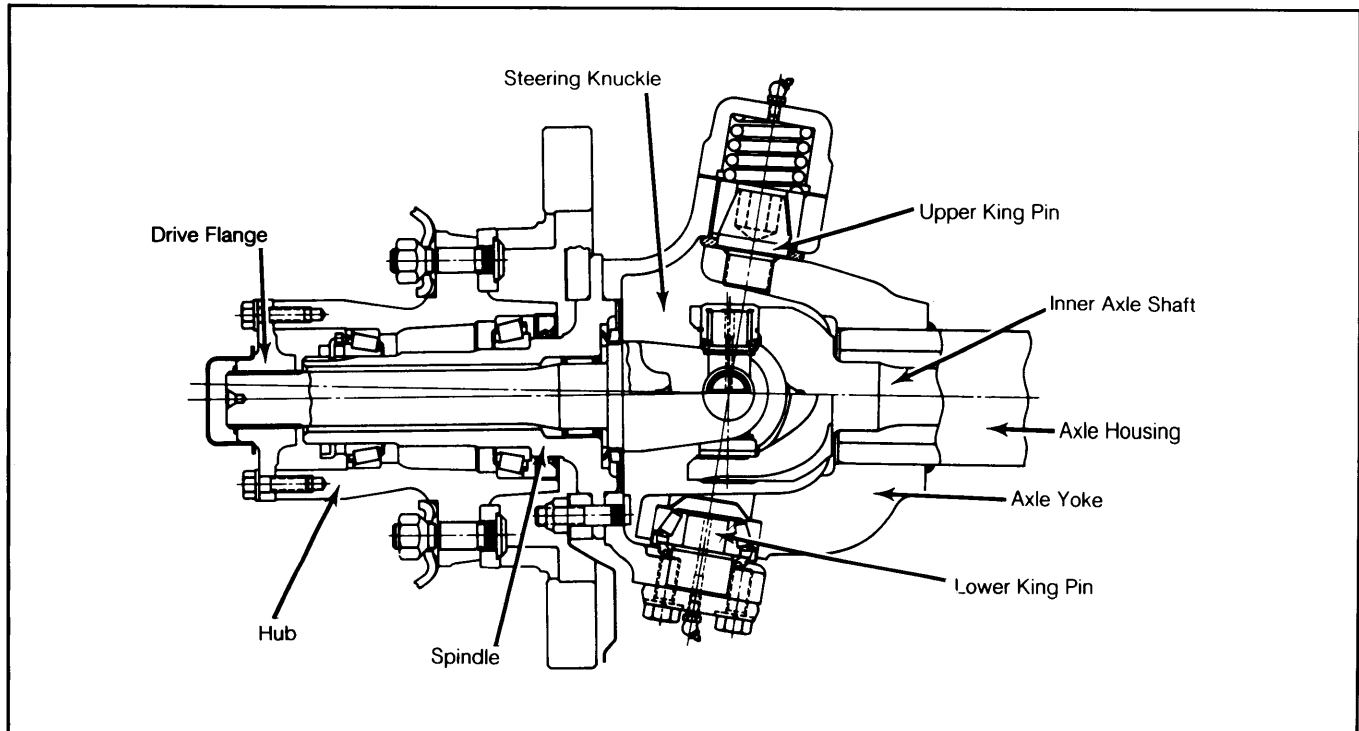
Sectional View of King Pin Type Steering Knuckle Assembly
